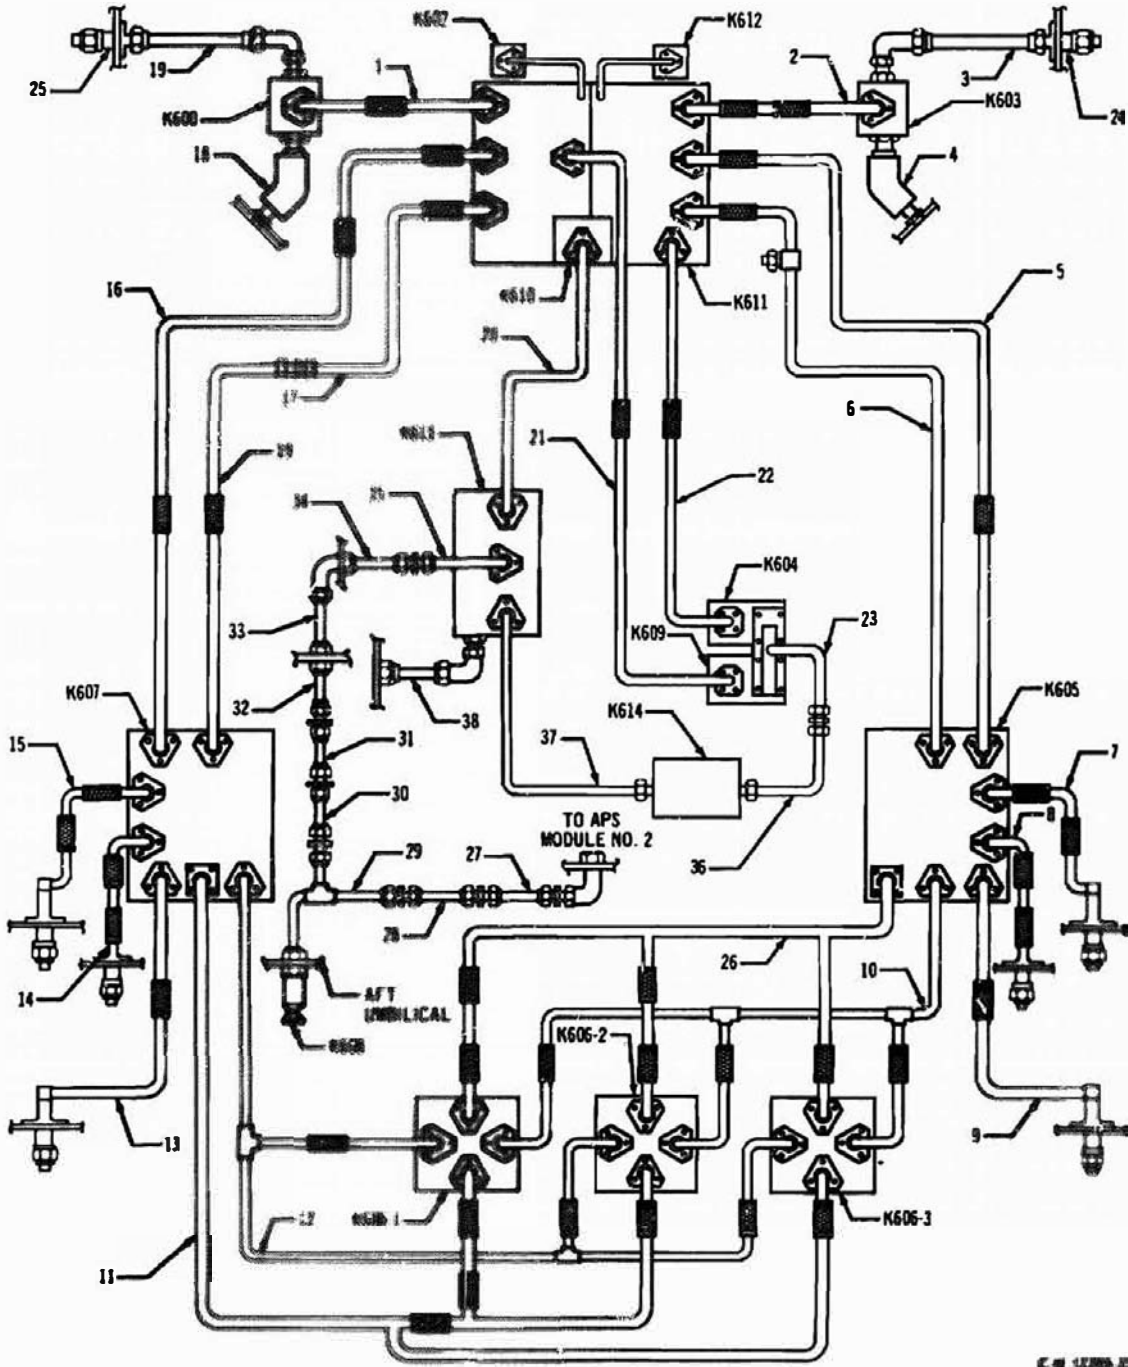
AUXILIARY PROPULSION SYSTEM - DETAILED SCHEMATIC
